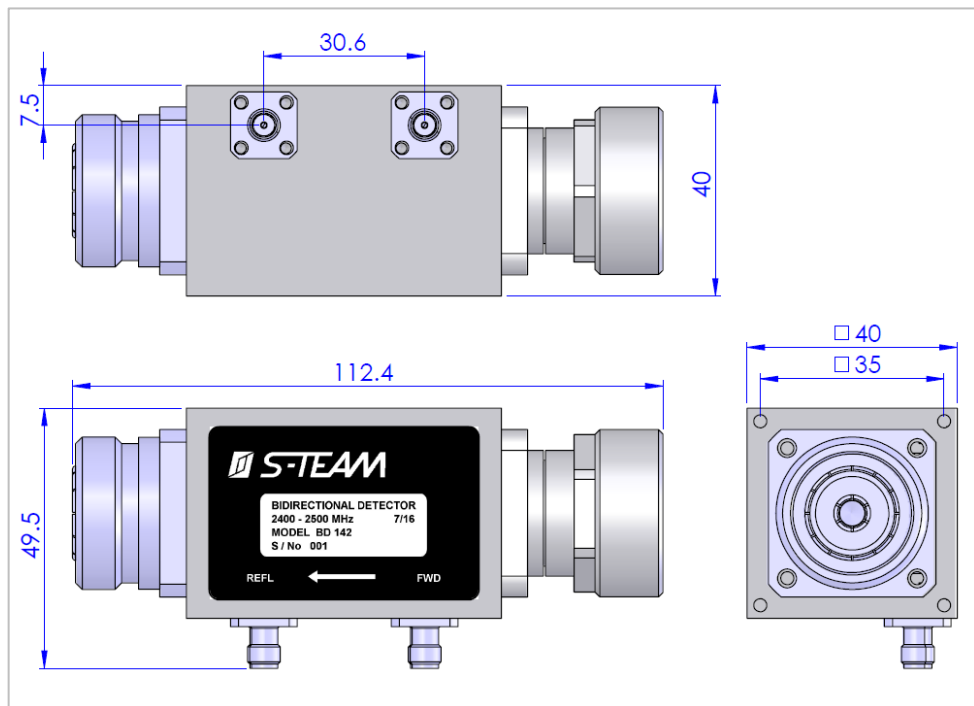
Basic BD142 dimensions. All dimensions are in millimeters.
